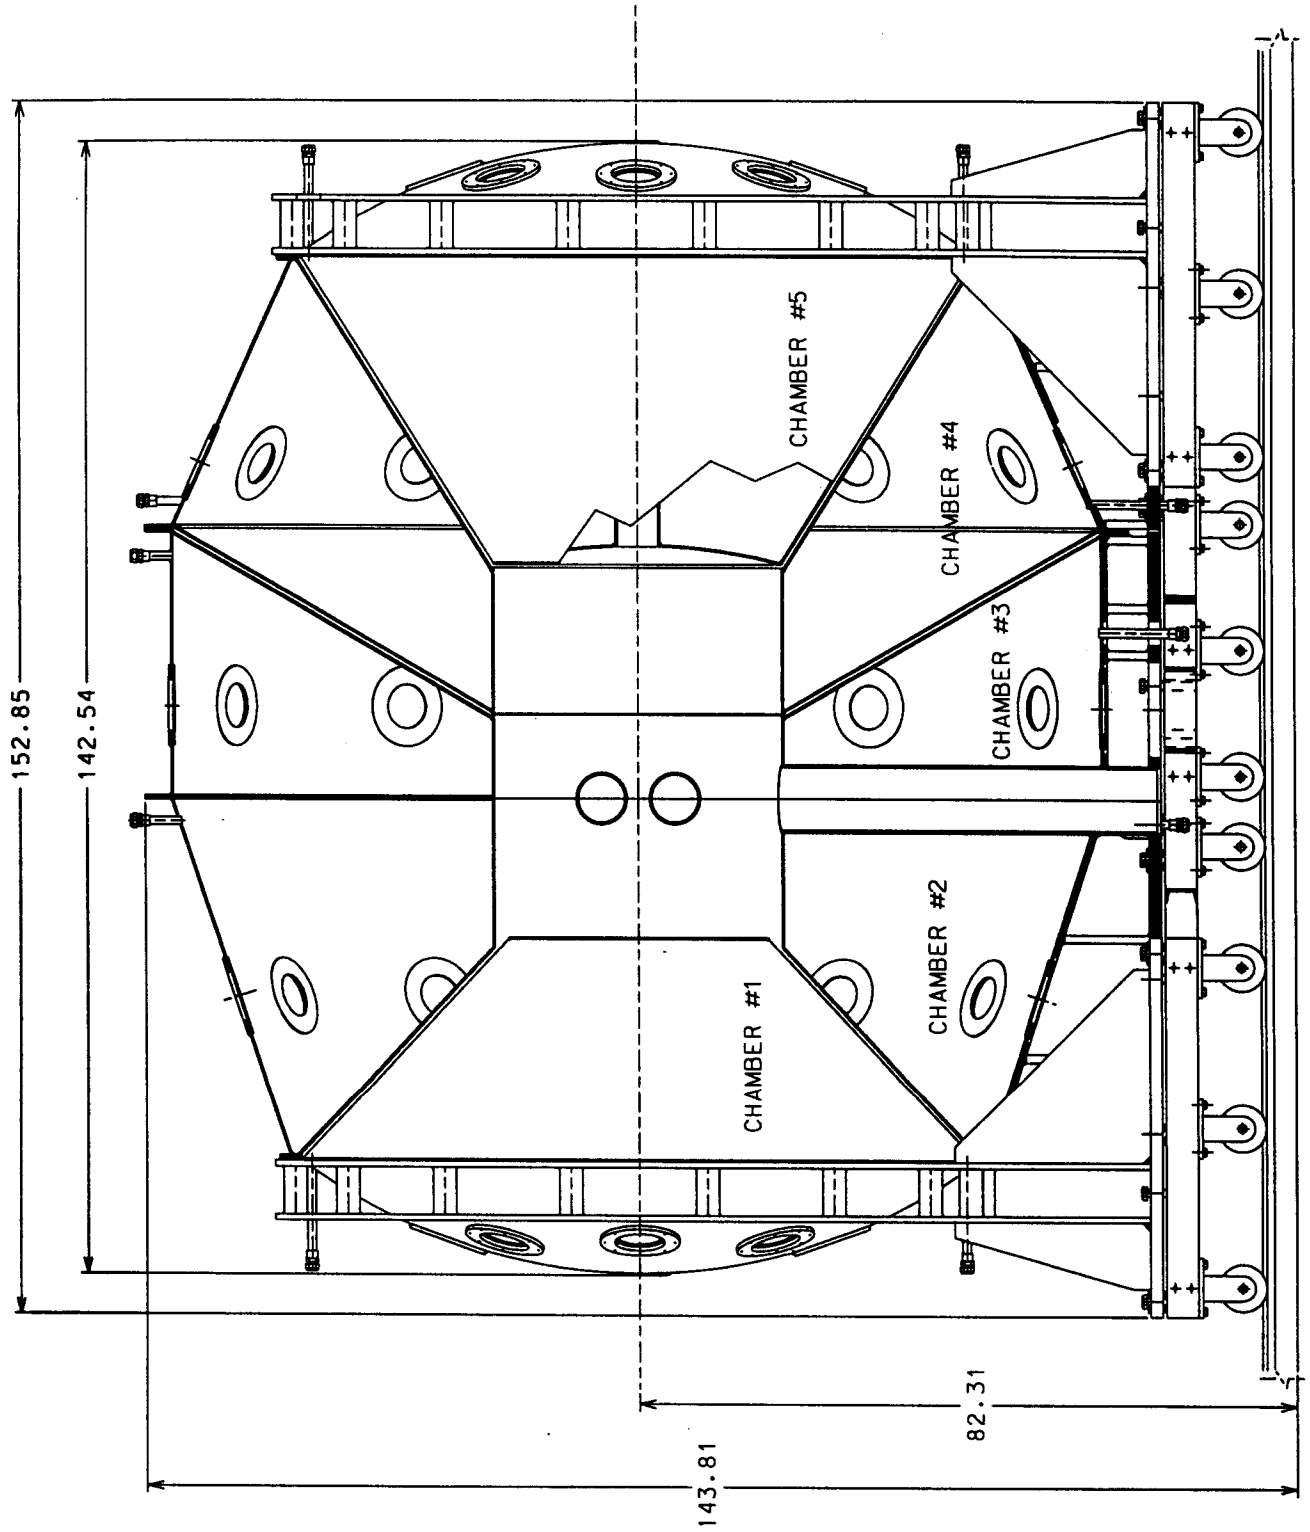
SuperBall engineering drawing of a vertical cross sectional view of docked tank assembly.
